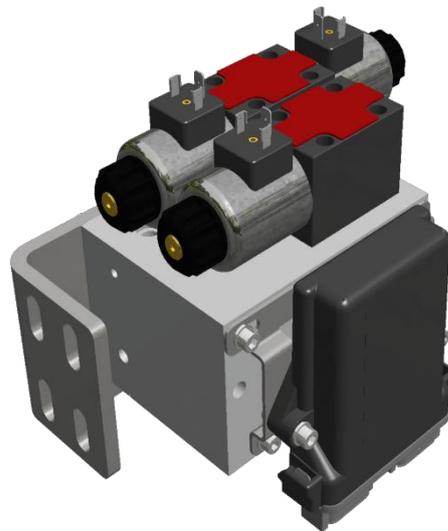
MANIFOLD BRACKET WITH A MANIFOLD AND HYDRAULIC DRIVE UNIT MOUNTED
